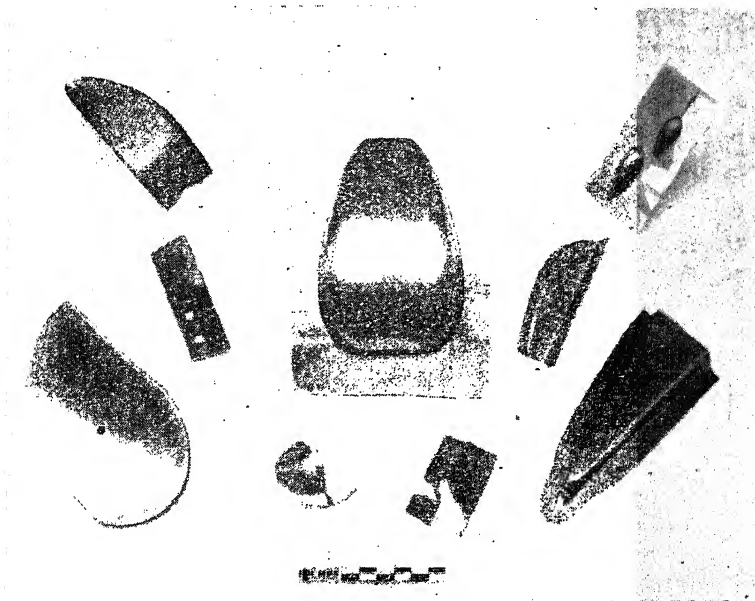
TYPICAL FAIRINGS MADE ON DROP HAMMER
